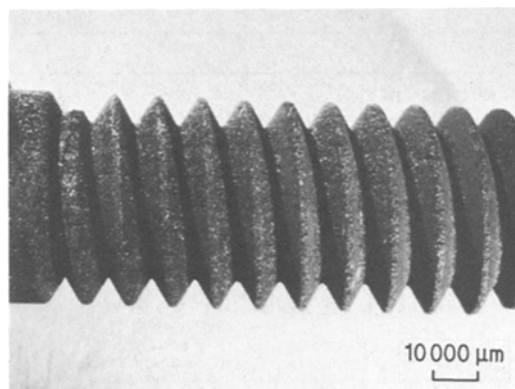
Bolt threads machined by a single-point tool in discontinuous Celion graphite fibre-reinforced borosilicate glass.
